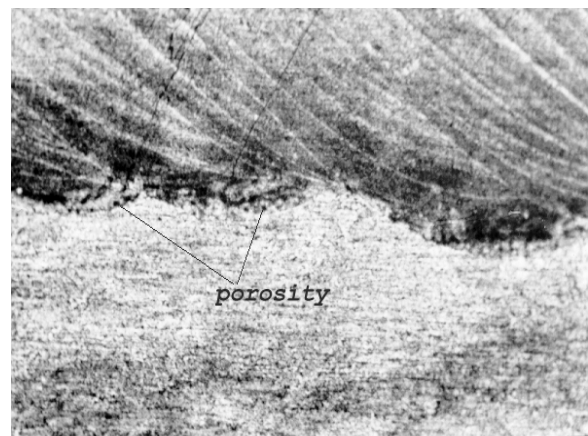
Porosity at root of Al1060 plate weld by electron beam welding (120kV,7mA)
